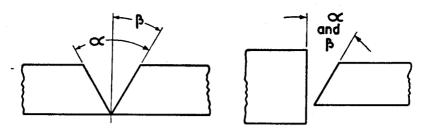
EXAMPLES OF INCLUDED ANGLE AND ANGLE OF BEVEL
